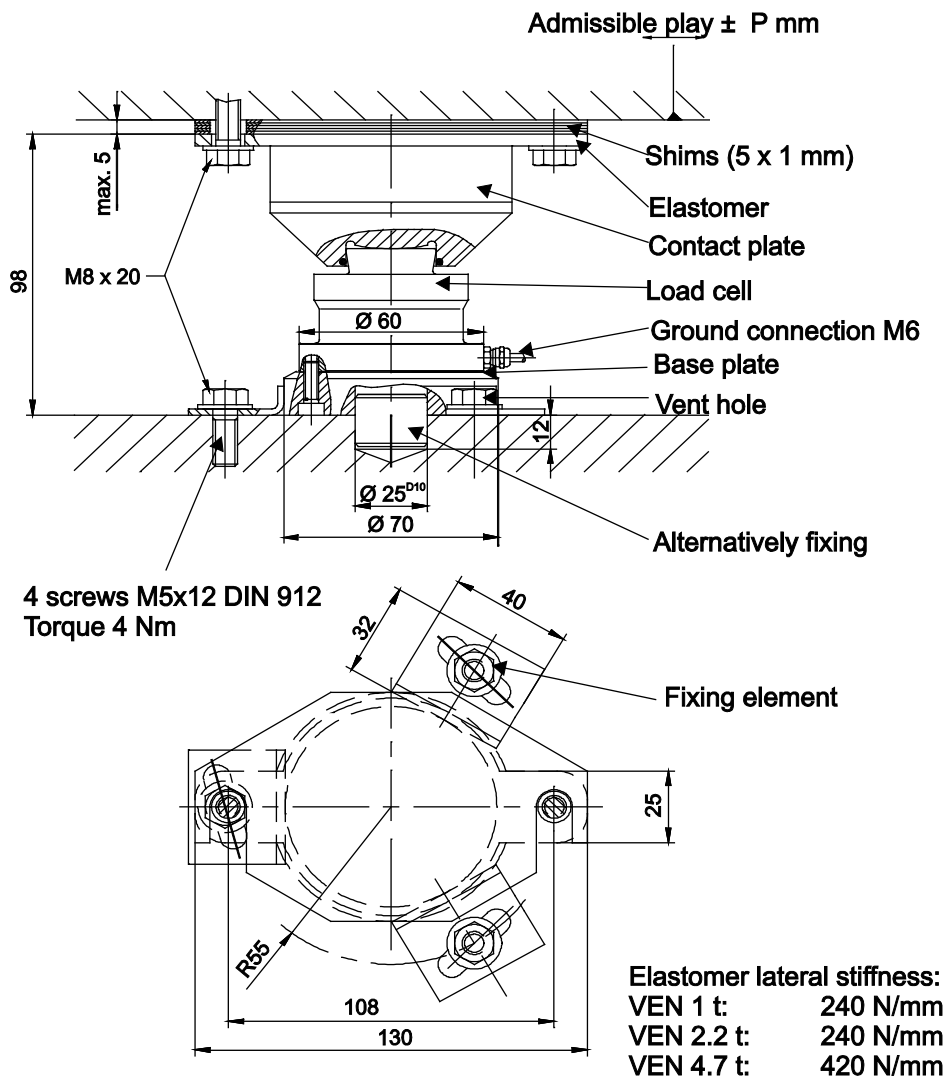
Installation of the 1 ... 4.7 t VEN bearing
